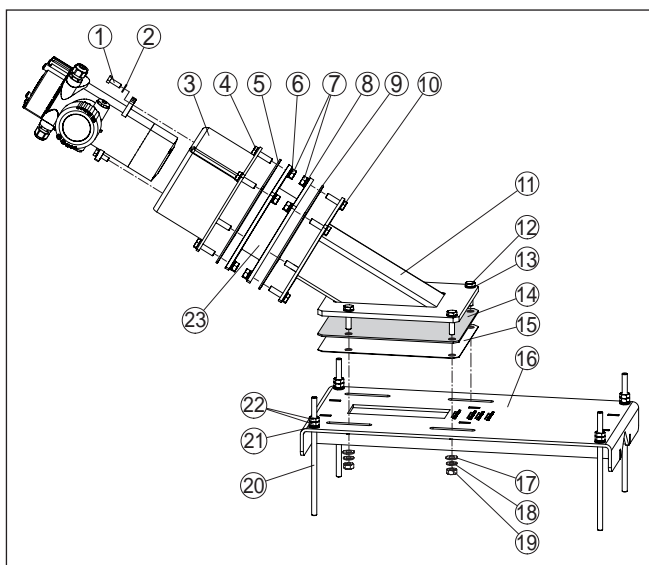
Mounting brackets - sensor side (MINITRAC)
